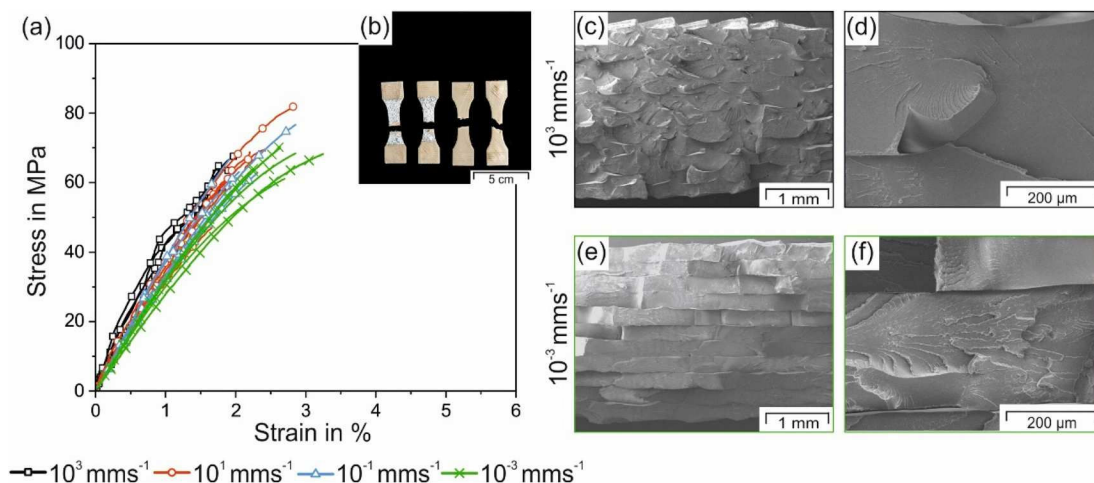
Stress-strain curves obtained from tensile tests performed on 3D-printed polyetheretherketone (PEEK) specimens at four different crosshead speeds (a), fractured samples after tensile testing (b) and scanning electron microscopy (SEM) fracture surfaces for high (c, d) and low testing speeds (e, f). The test speed in (b) decreases from left to right: 10^3 , 10^1 , 10^{-1} and 10^{-3} mms^{-1} .
